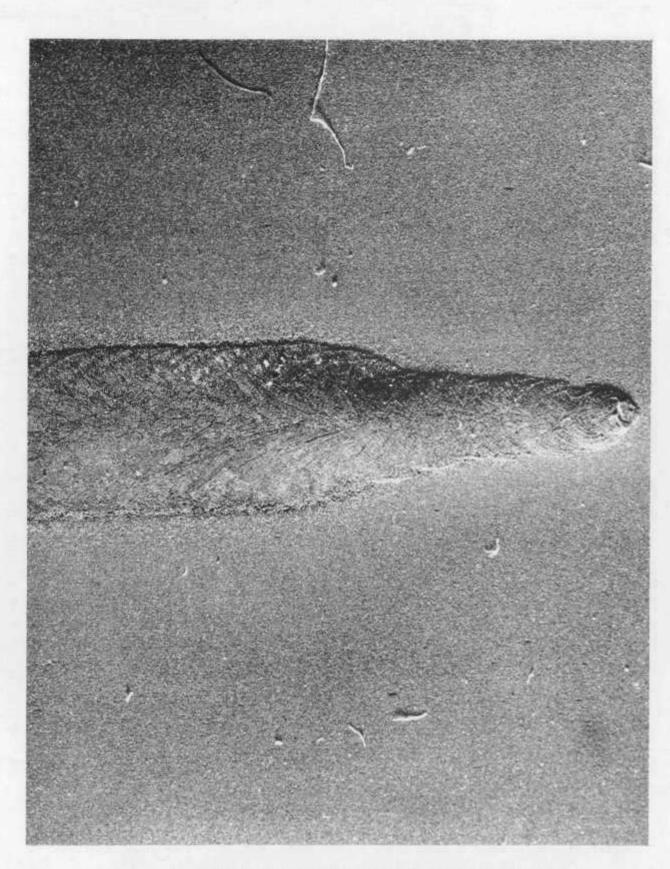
Pitting at Edge of Weld after Huey Test (15X)
